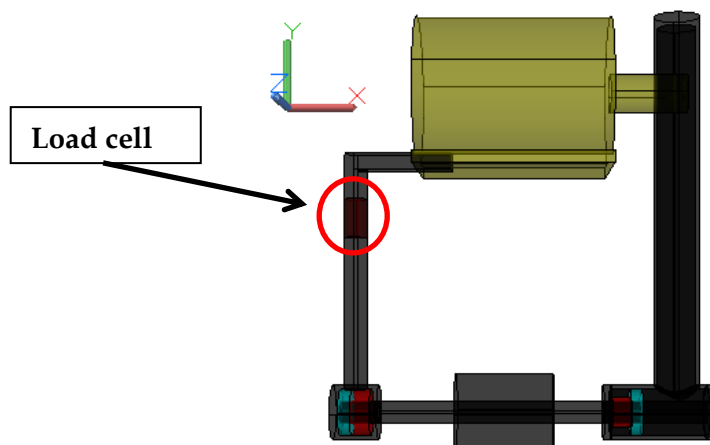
Drill-pipe assembly with electric motor (yellow) and bearings (blue) and seal (red)
